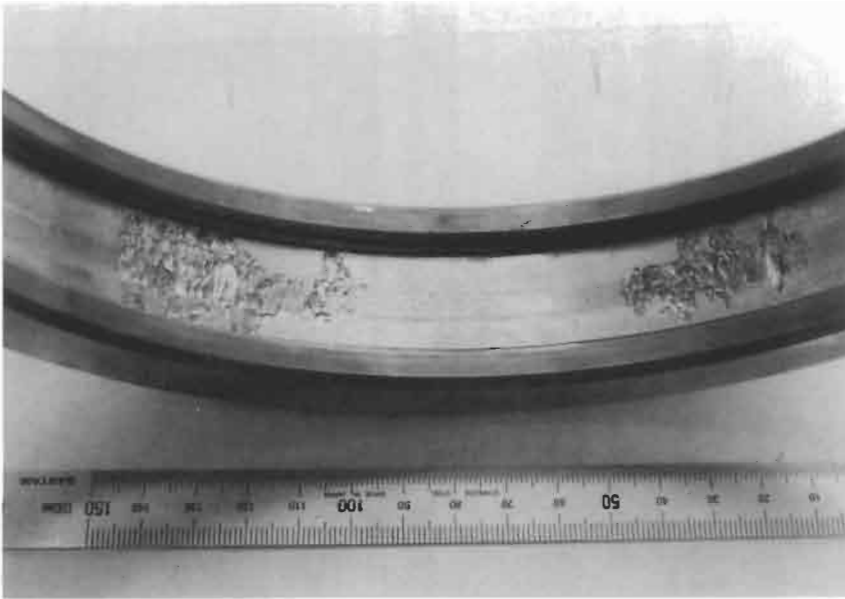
Flaking damage on the outer raceway of a roller bearing.
